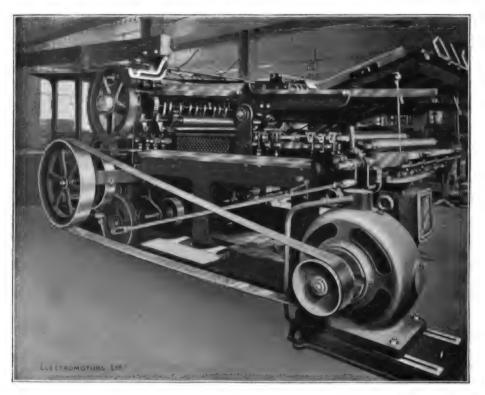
ELECTRIC MOTOR DRIVING LETTERPRESS MACHINE.
